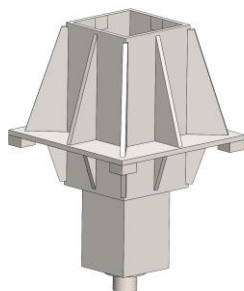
Isometric view of mock X-axis and Z-axis assembly.
